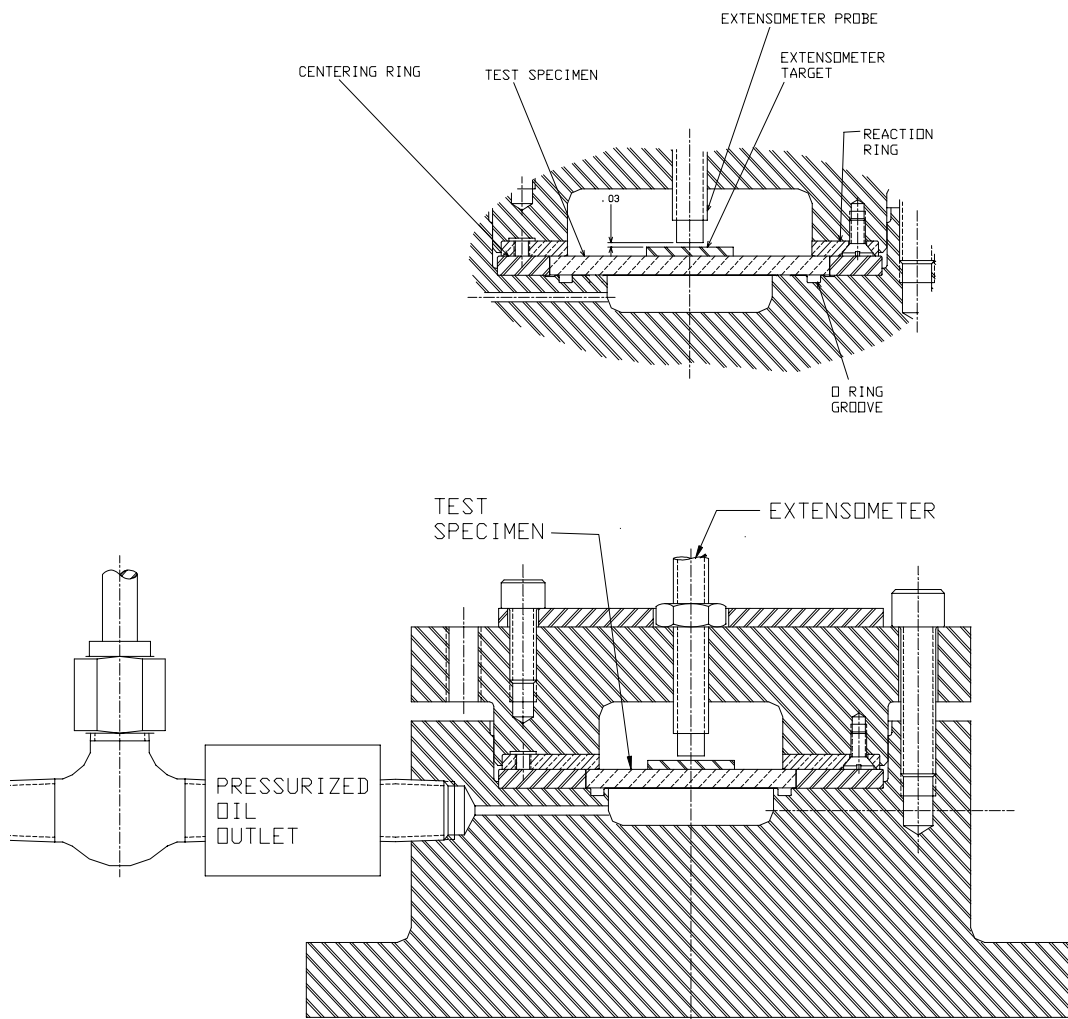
Section view assembly drawing for a biaxial test apparatus capable of applying a uniform pressure to a disk test specimen.
